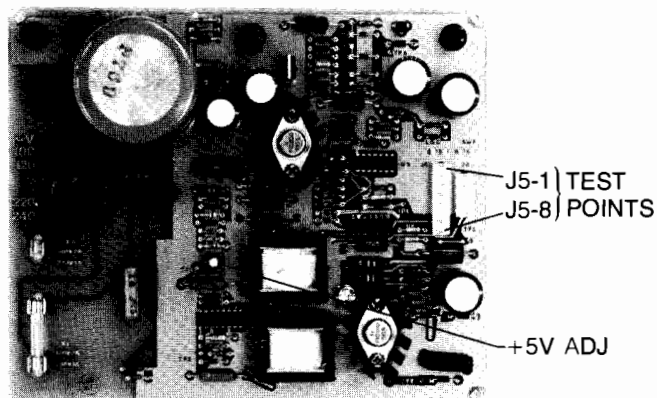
2622A/D Power Supply PCA (02620-60004) Test Points and +5V Adjustment Locations
